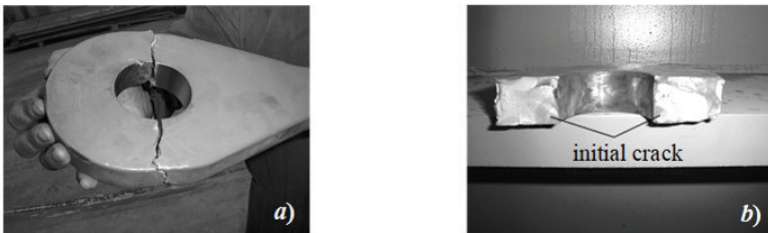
Fatigue breakage of testing bar (a) and example of fracture surface (b)
